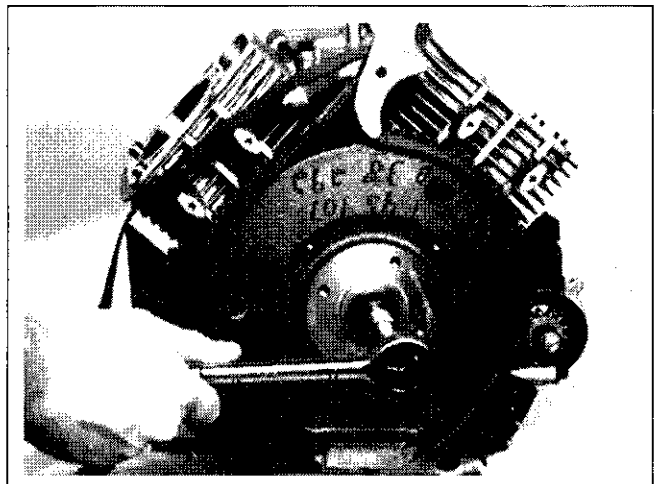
Removing Flywheel Fastener Using Strap Wrench.
